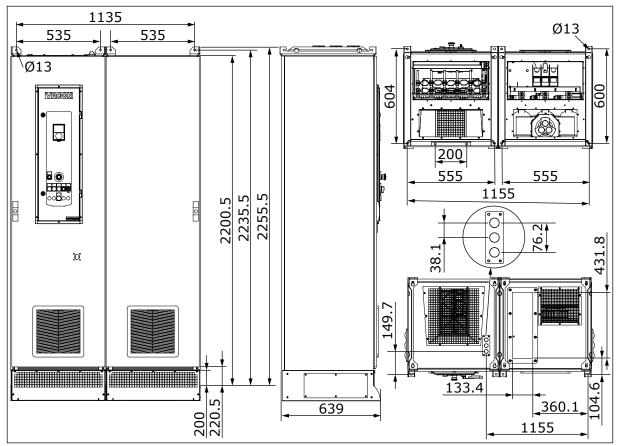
The dimensions of the cabinet with the optional sine filter, MR10, [mm], NAM
